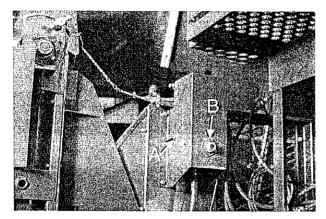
1425/1500 Planetary Gearbox Reservoir. A) Fill Plug B) Sight Plug
